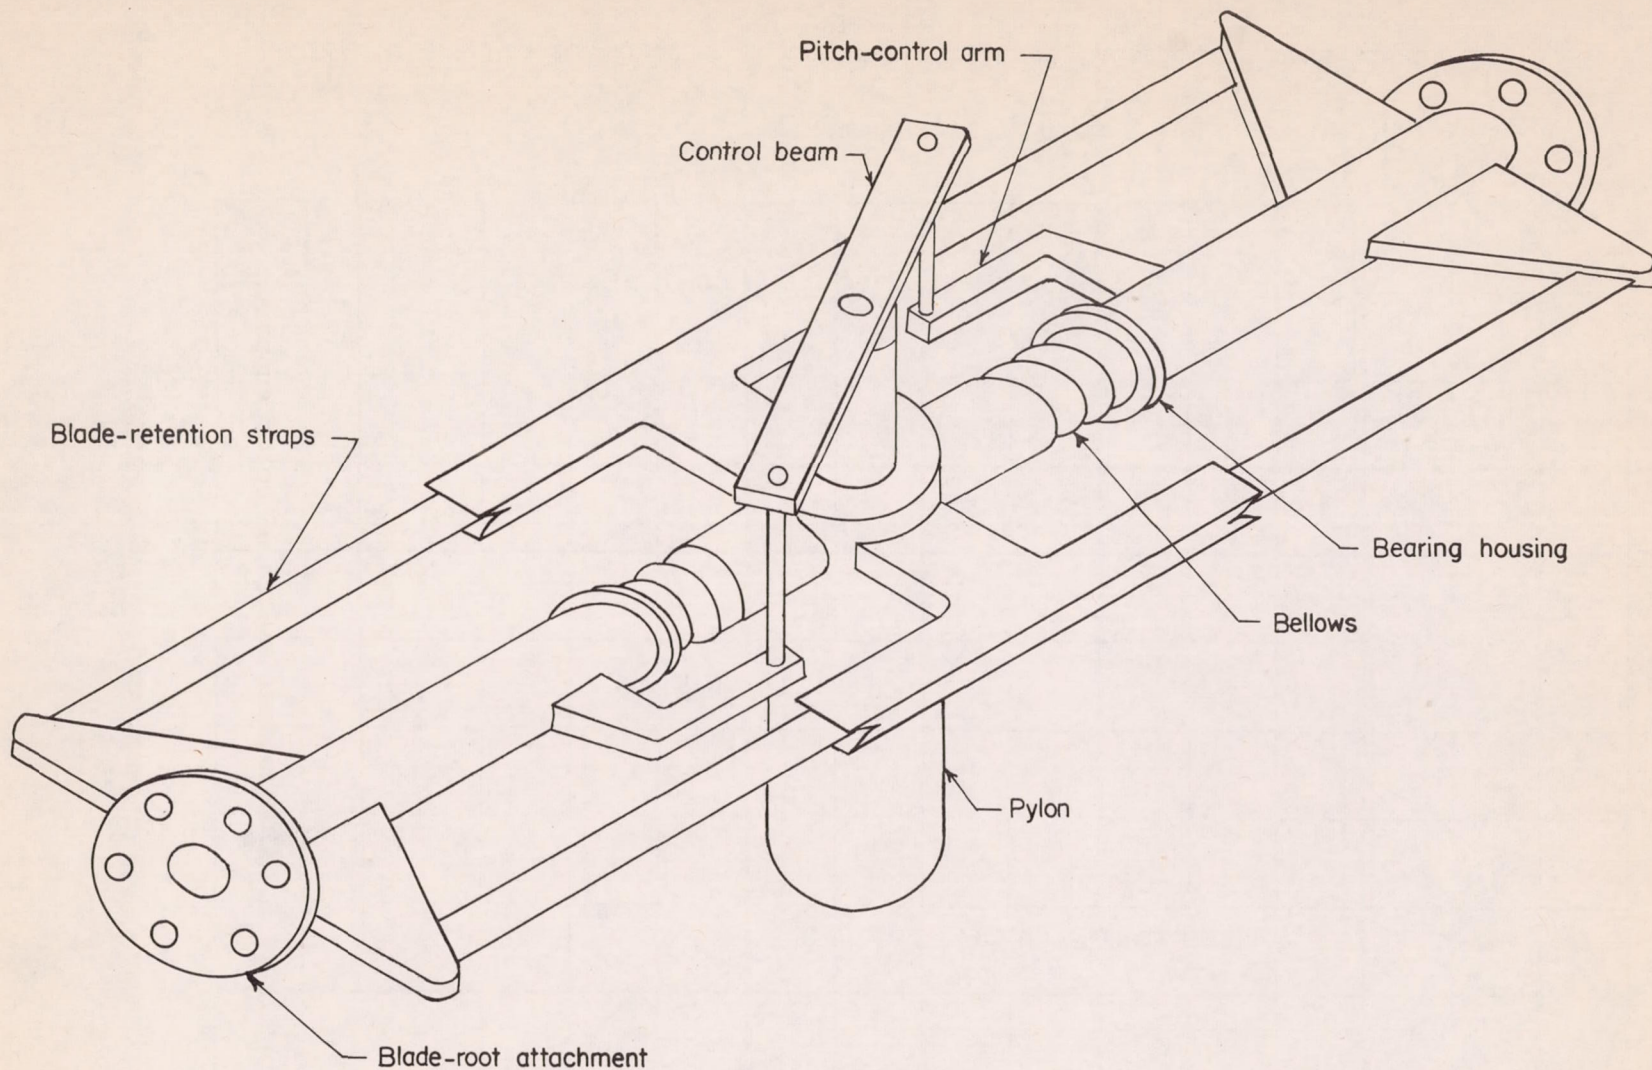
Schematic drawing of rotor hub showing control-beam installation.
